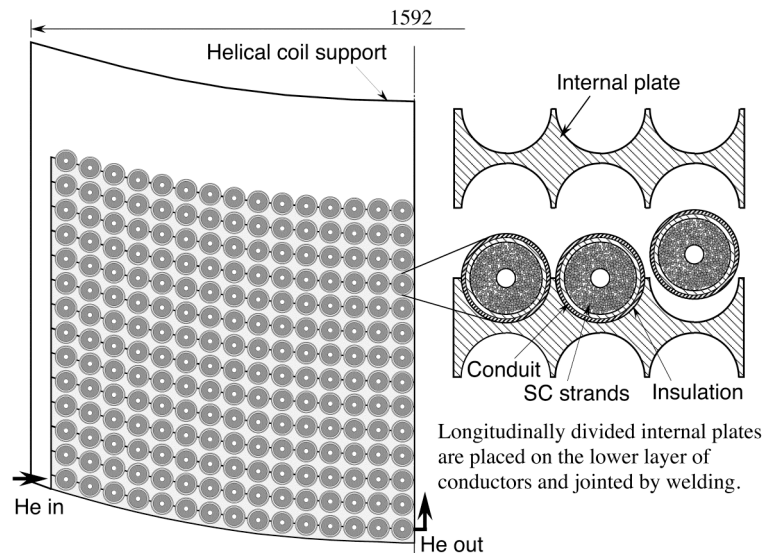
Cross-sectional drawing of helical winding with CIC conductors.
